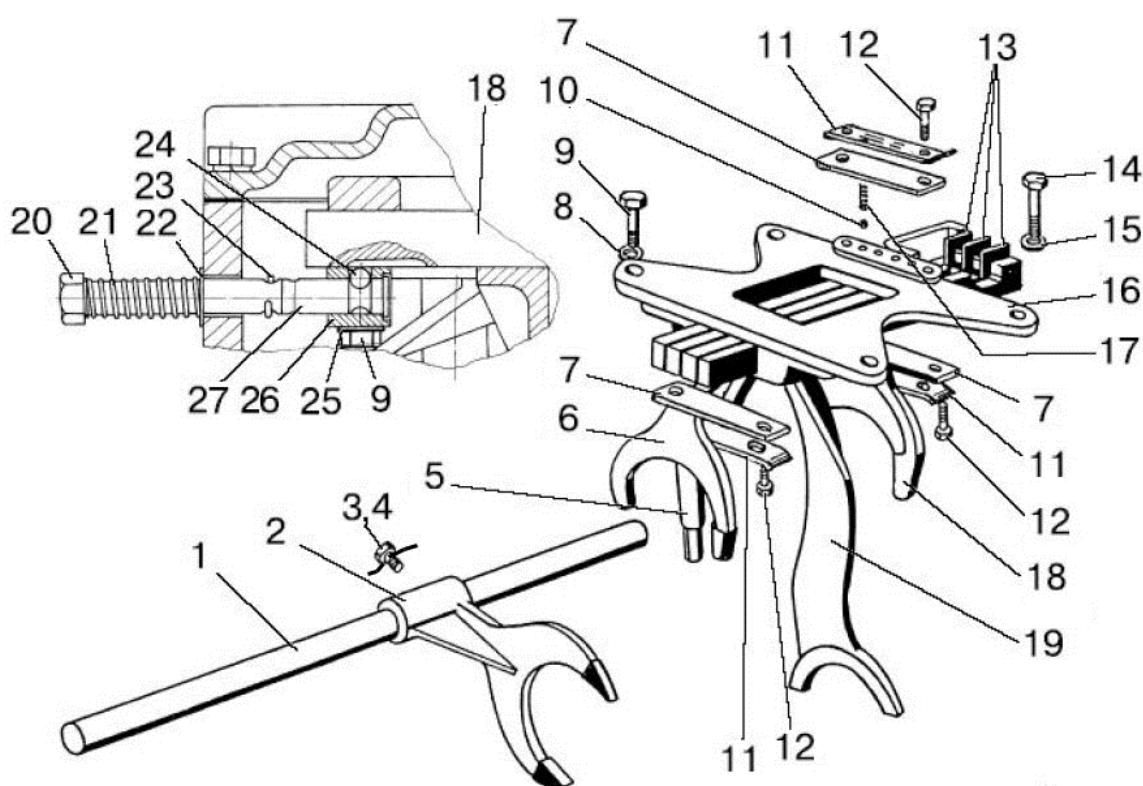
Mechanical gearbox control mechanism. Fork body.
